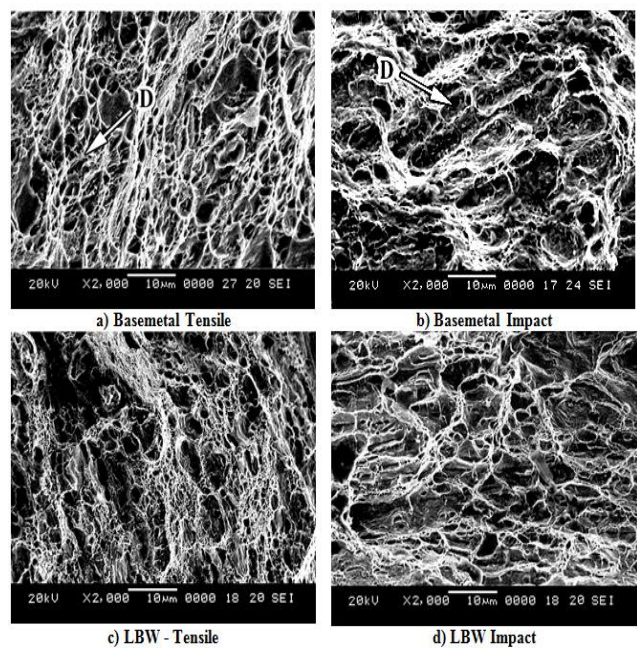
SEM Fractographs of Tensile and Impact Tested Specimens
